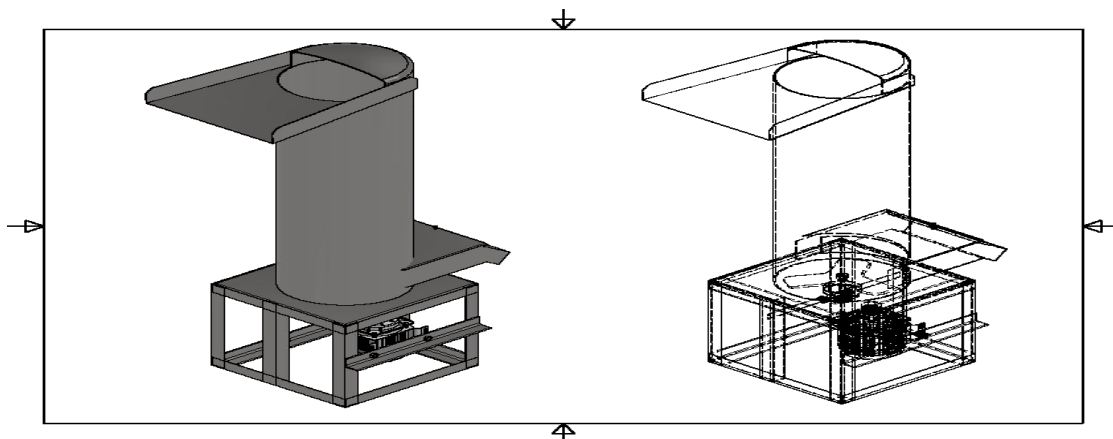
Isometric view of the prototype agricultural waste shredding machine.
